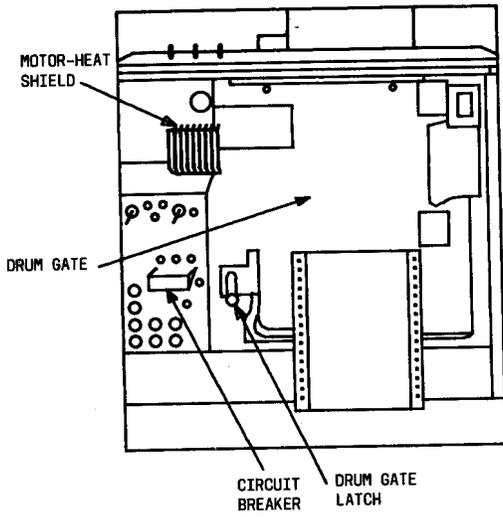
Inside the HP Line Printer (For Reloading Paper)
